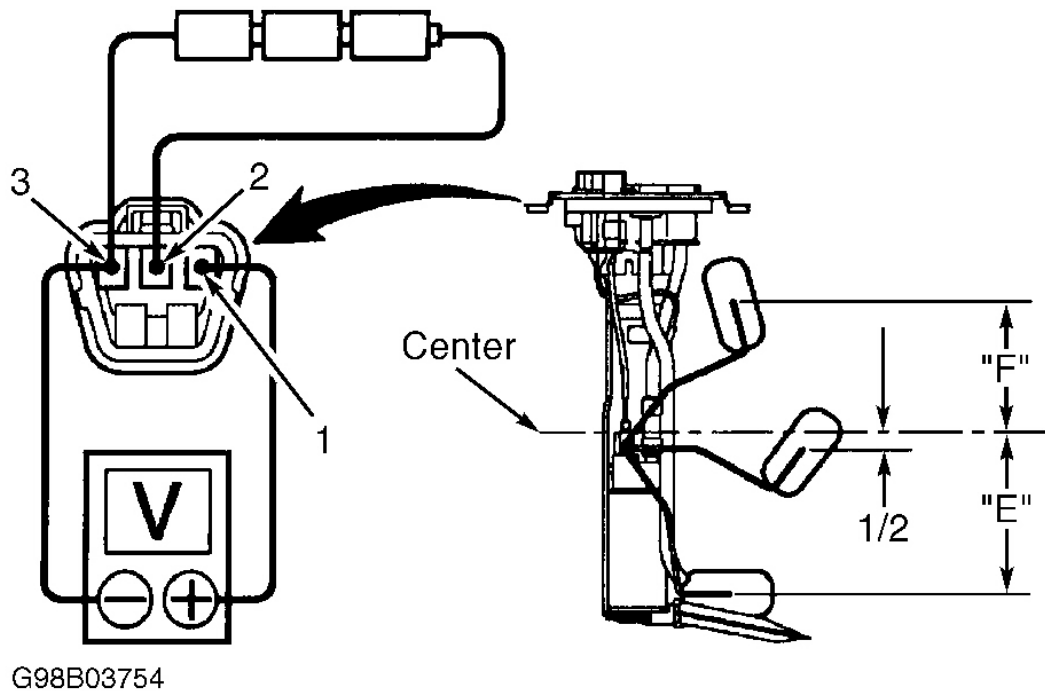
Testing Fuel Gauge Sending Unit (Land Cruiser)
